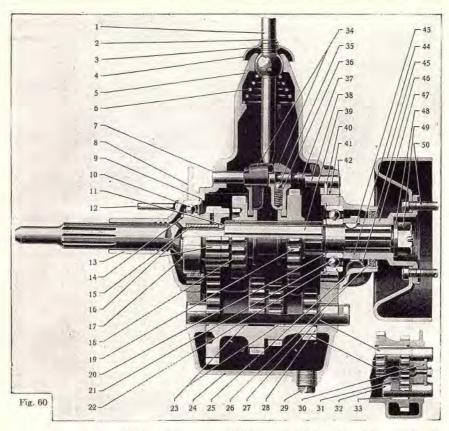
The transmission is a selective, sliding gear type built in a unit with the engine. There are three forward speeds and one reverse. The gear shift is the S.A.E. standard. The transmission drive gear 16 is an integral part of the clutch shaft. The high-speed gear 18 is of the internal tooth type, and the countershaft assembly is in constant mesh. The main shaft 39 operates on a ball bearing 21 in the rear, and a roller bearing 15 in the front (mounted in the main drive gear), and the countershaft gears are fitted with bronze bearings 23, and revolve on a stationary countershaft 27.
